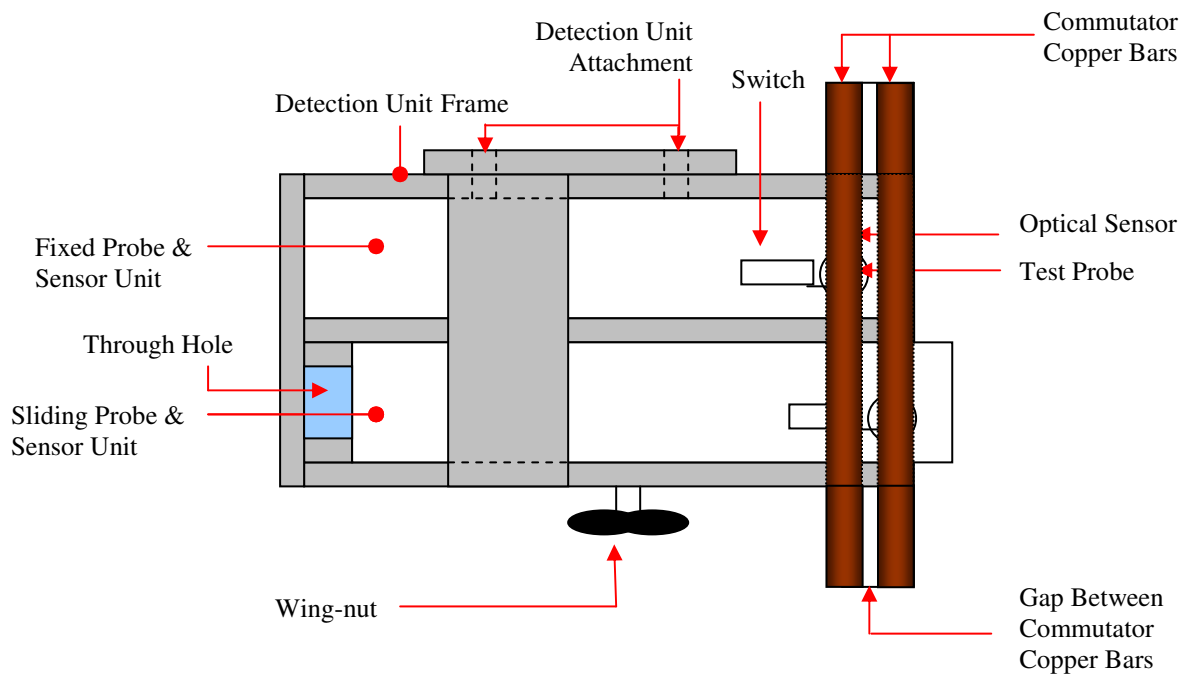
A: SKETCH OF SPRING LOADED TEST PROBES [LEFT VIEW]
